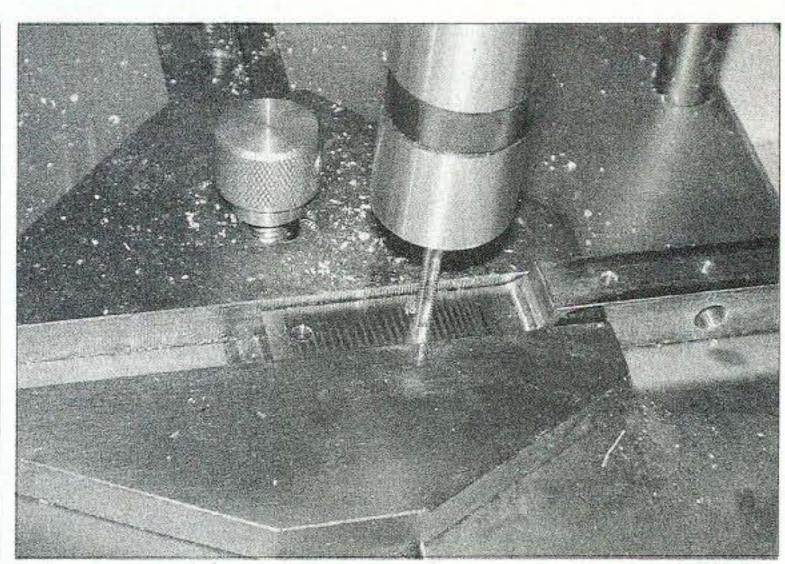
Photo F. Using a hand tapping machine to tap the threaded holes in the armature.
